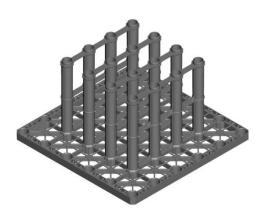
Insert and click the 4 STM Inner panels into the large bottom plate in given locations using a dead blow hammer. To make STM-01 Units.
